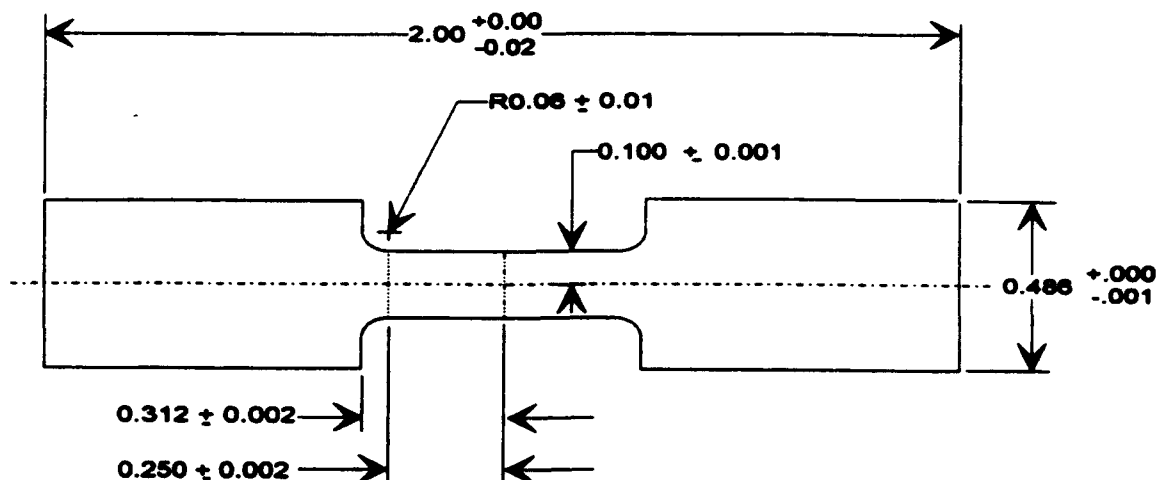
Tensile Test Specimen Drawing (All dimensions are in inches)
